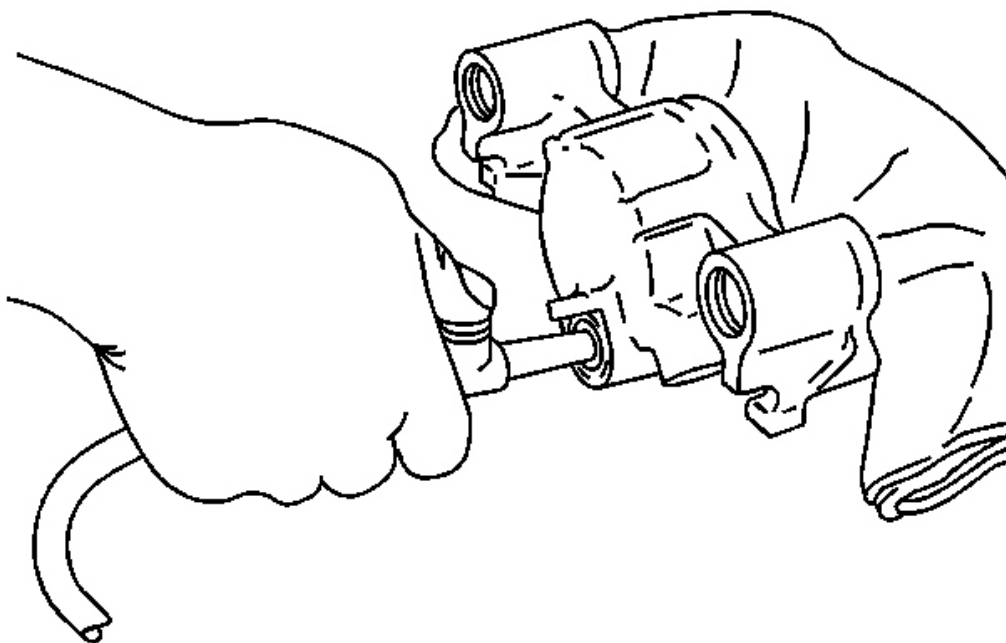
Applying Compressed Air To Caliper Fluid Inlet Hole
